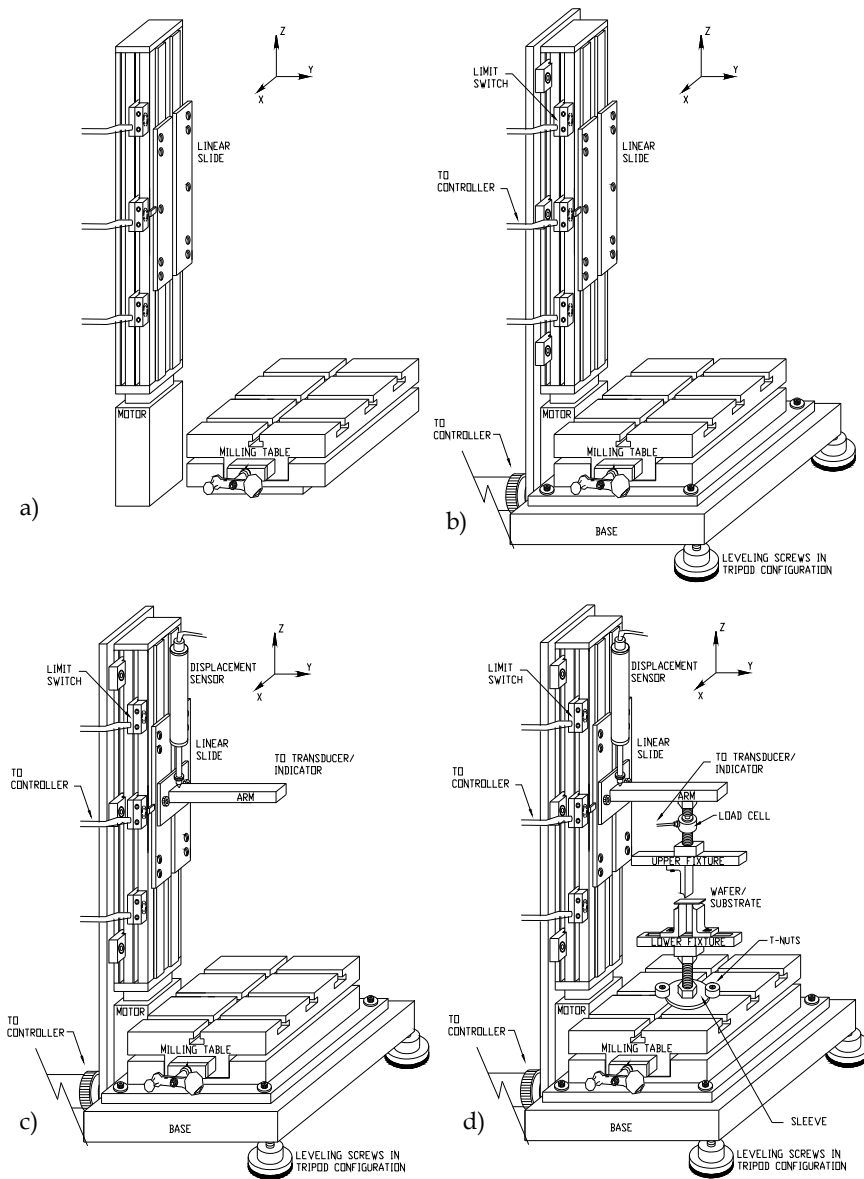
(a) Small-scale loading machine designed around a commercially-available linear slide and milling machine table. (b) Aluminum plates were fabricated to connect the slide and table with keyways for easy and reproducible assembly. (c) An arm attached to the slide and t-slots in the milling machine table enables a variety of fixtures to be assembled in the platform, such as those shown for three-point bending (d).
